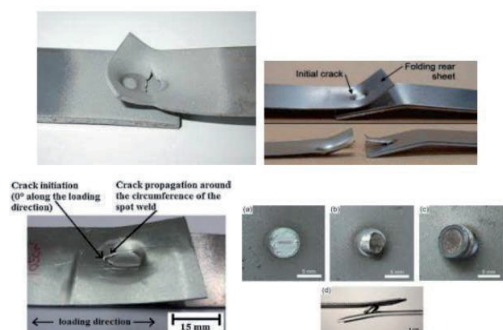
Fracture behavior of welded plates (shear tensile test) [29][30]
